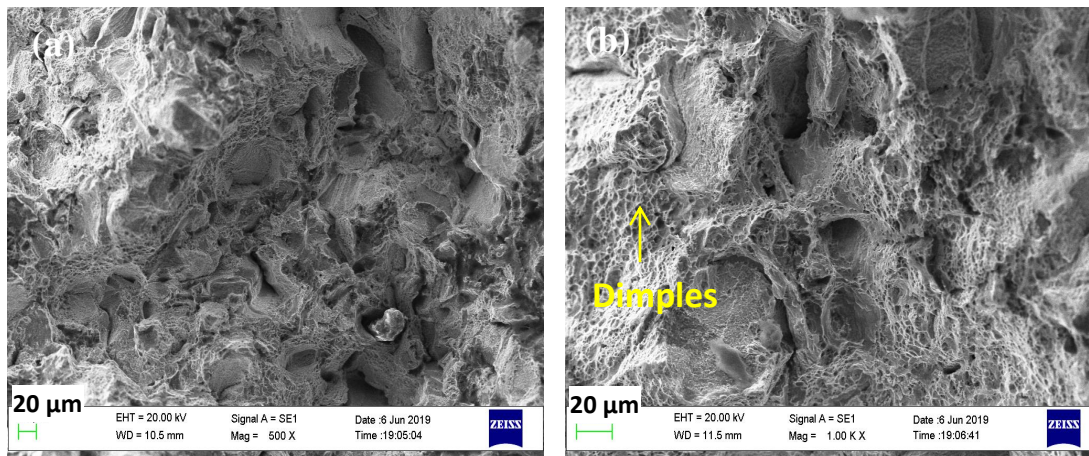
SEM fractographs of tensile tested samples at 700°C in SQ-AG2 condition showing: (a) ductile fracture with facets and (b) magnified view of the facets.
